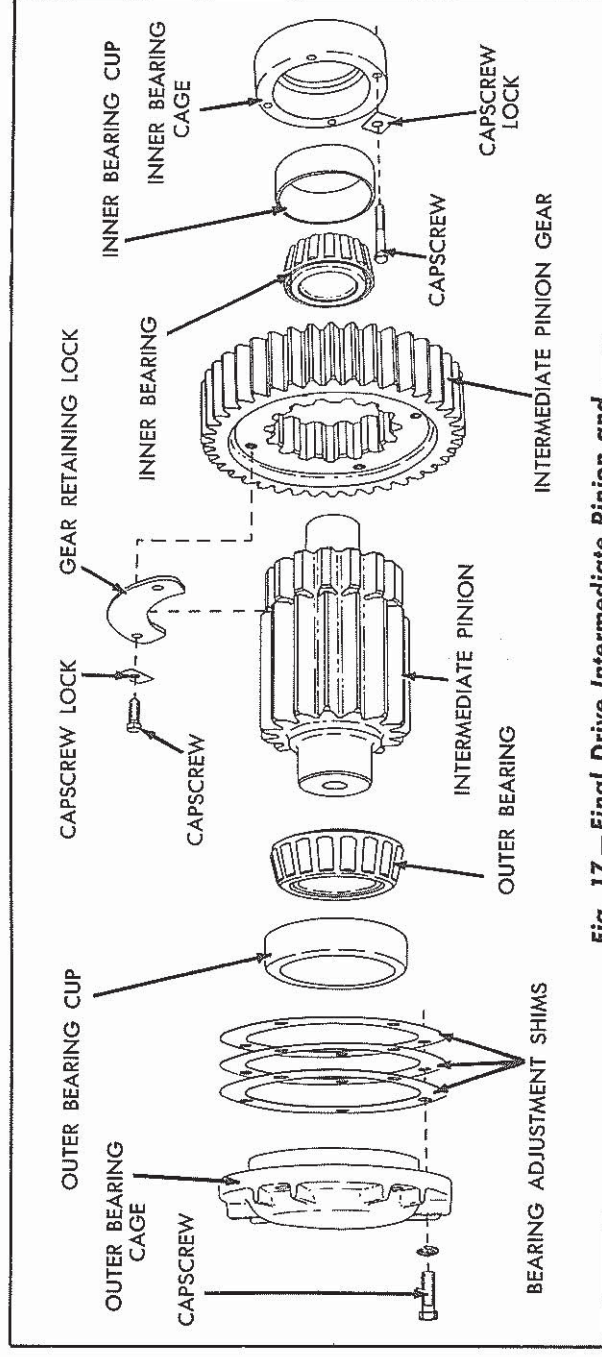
Final Drive Intermediate Pinion and Gear Details
